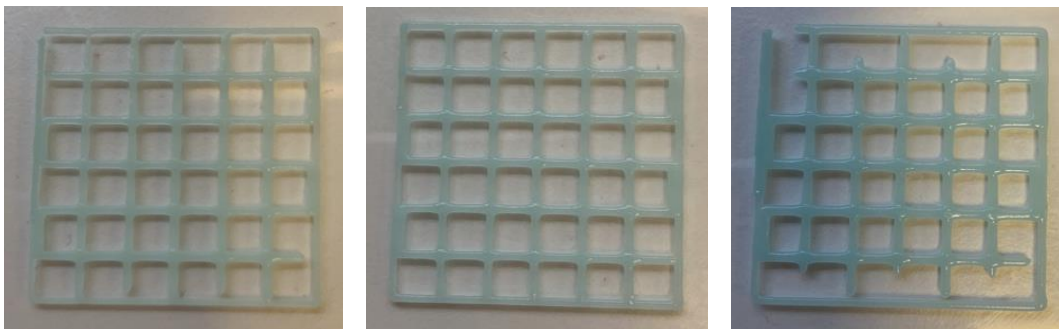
Adjusting the post-flow delay: A) short, B) enough, C) long delay
